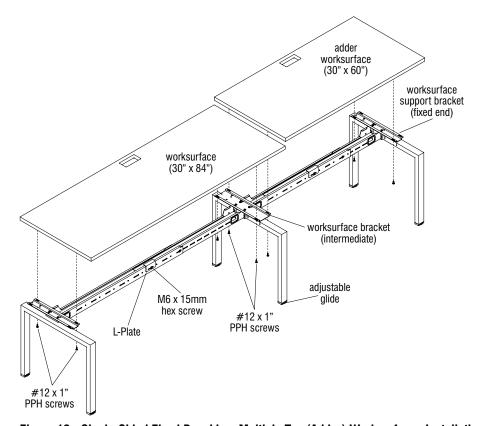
Single-Sided Fixed Benching, Multiple Top (Adder) Worksurfaces Installation
